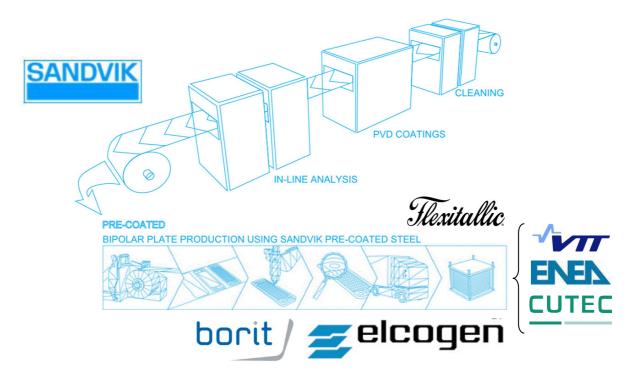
The interconnect/bipolar plate manufacturing process in NELLHI: preparation and coating of the steel (SANDVIK), shaping, cutting and welding (BORIT) on ELCOGEN OY's design, assembly with cells (ELCOGEN AS) and gaskets (FLEXITALLIC). The cells and stack are continuously validated by VTT, ENEA and CUTEC.
